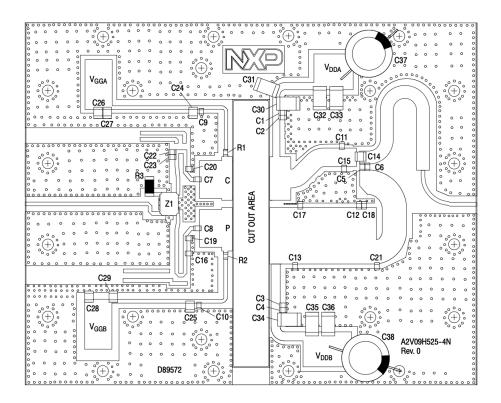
Reference Doherty Printed Circuit Board Layout and Component locations
